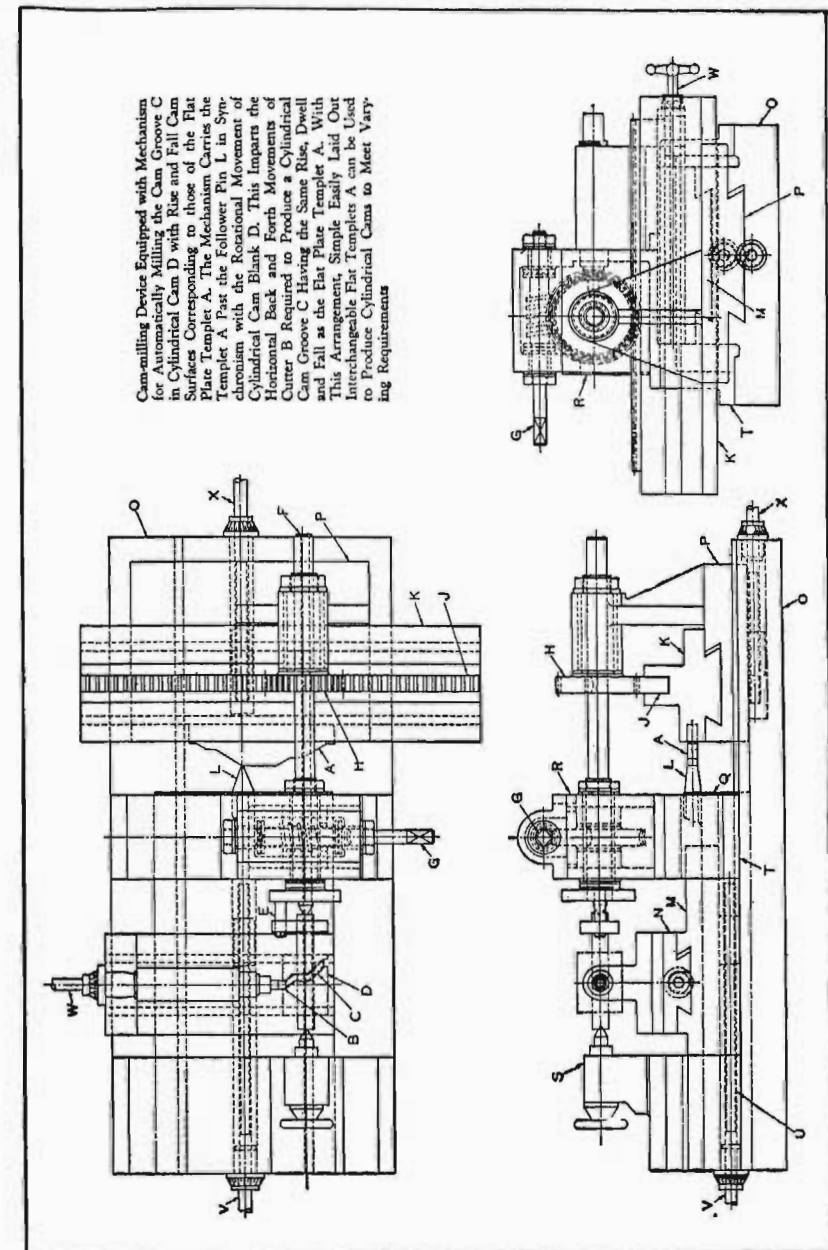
Cam-milling Device Equipped with Mechanism for Automatically Milling Cam Groove *C* in Cylindrical Cam *D* Using Flat Templet *A*.
